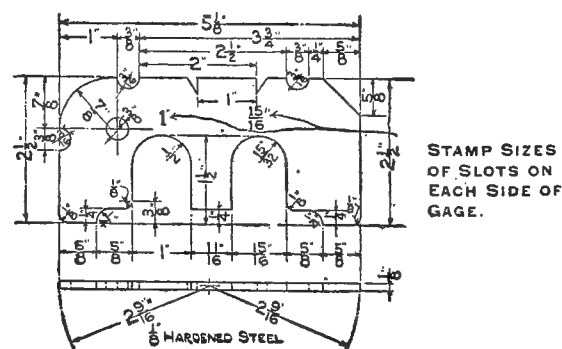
WHEEL DEFECT AND WORN COUPLER LIMIT GAGE.
